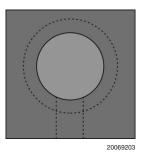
Solder-Mask-Defined Pad Layout on PCB
